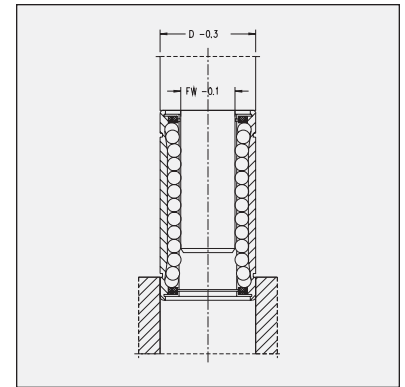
Assembly Of Linear Ball Bearings Series KBZ, KNZ
